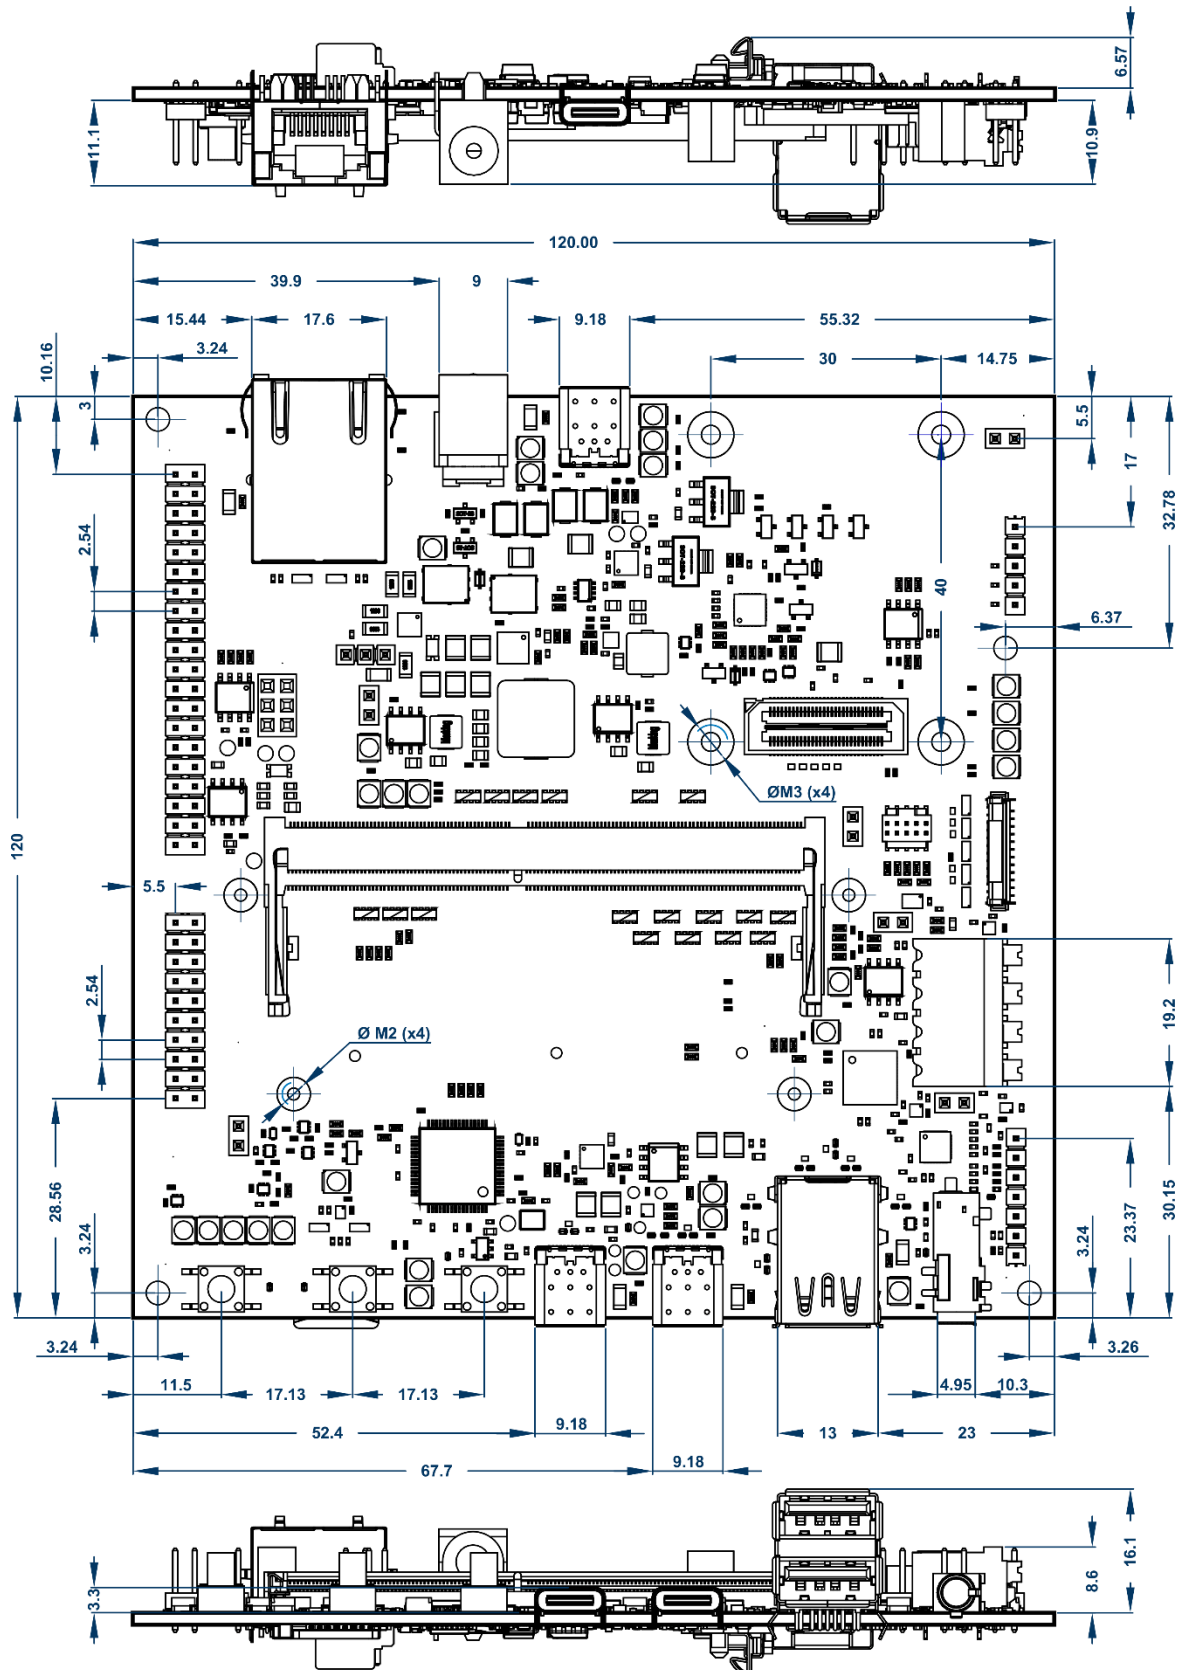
Dahlia Carrier Board Dimensions (in millimeters) – Top Side
